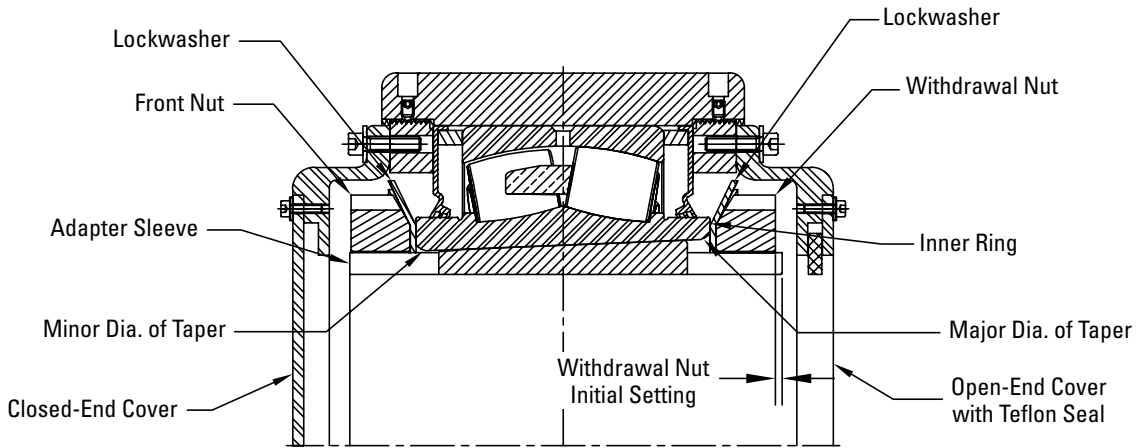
Cross-sectional view of bearing sizes 23132K to 23140K.
